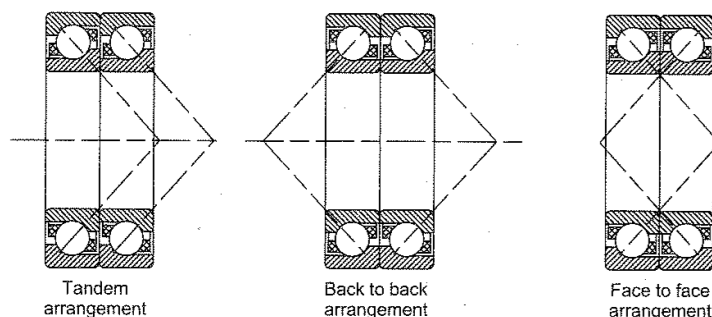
Paired mounting of a single row angular contact ball bearing
